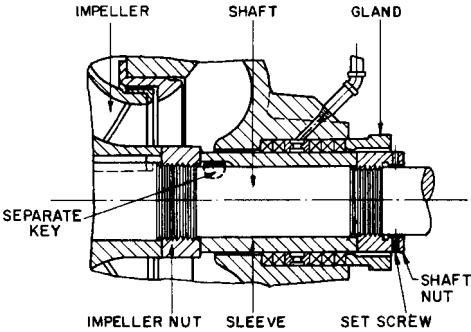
A sleeve with an internal impeller nut, external shaft-sleeve nut, and a separate key for the sleeve
